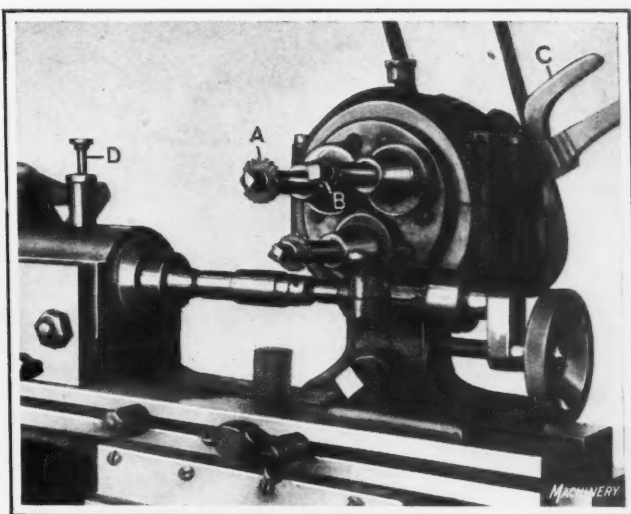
Milling Machine with Special Cutter-head for machining Gage Train Wheels
